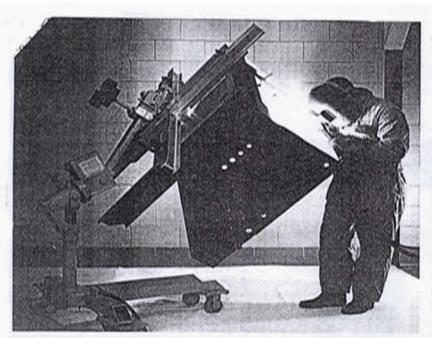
The Aronson Machine Company's Universal Balance can rotate a workpiece 360° around the positioner's column, and also 360° around two other axes through the part's center of gravity. Only finger-tip pressure is needed to move a workpiece weighing up to 4000 lb [1800 kg] into a new position. You can turn any odd-shaped workpiece that will fit on this machine into any position that will help you weld downhand.
